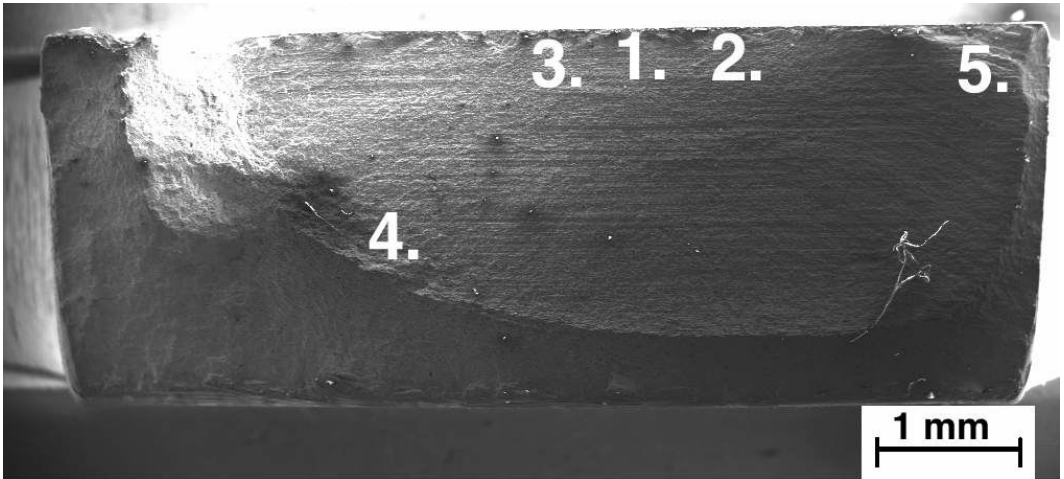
Overview of the fracture surface AA6082.50-T6 base material specimen with most cycles to fracture. The numbers represent the different areas investigated further below.
